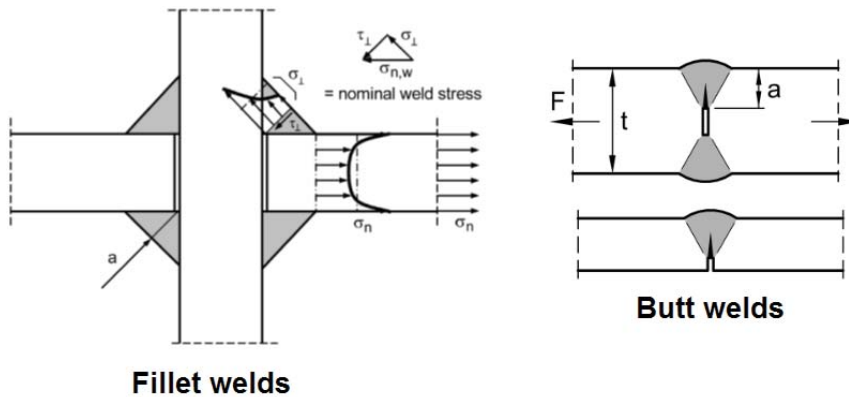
weld stress, for assessment of weld root cracking.
